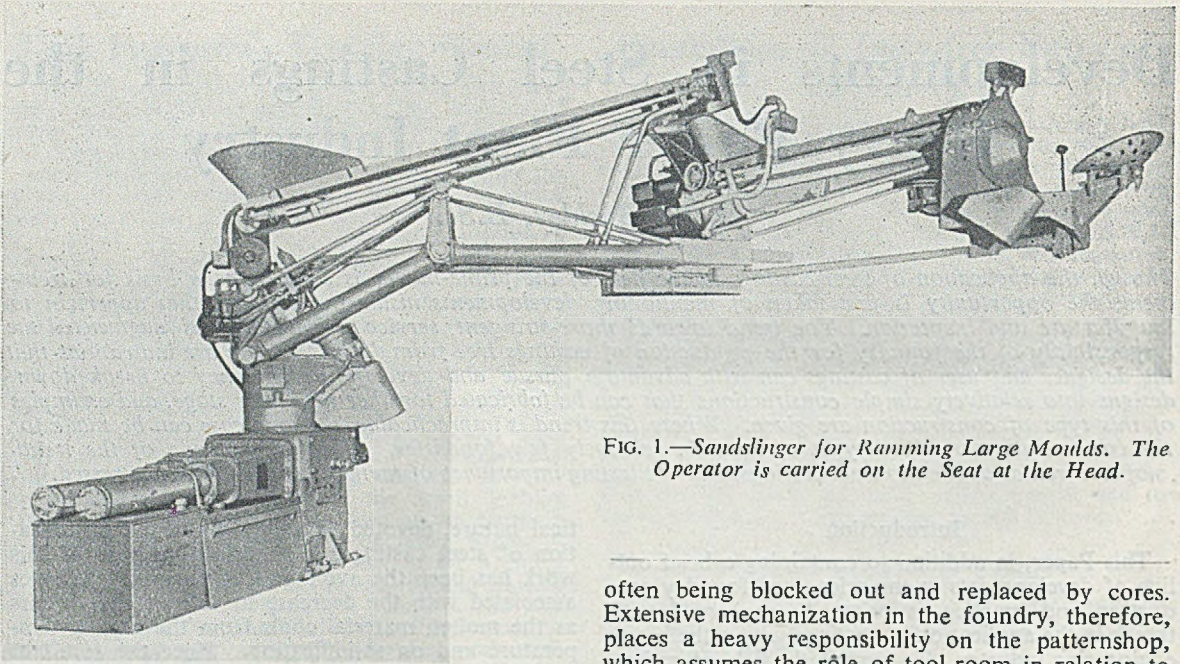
Sand-slinger for Ramming Large Moulds. The Operator is carried on the Seat at the Head.
